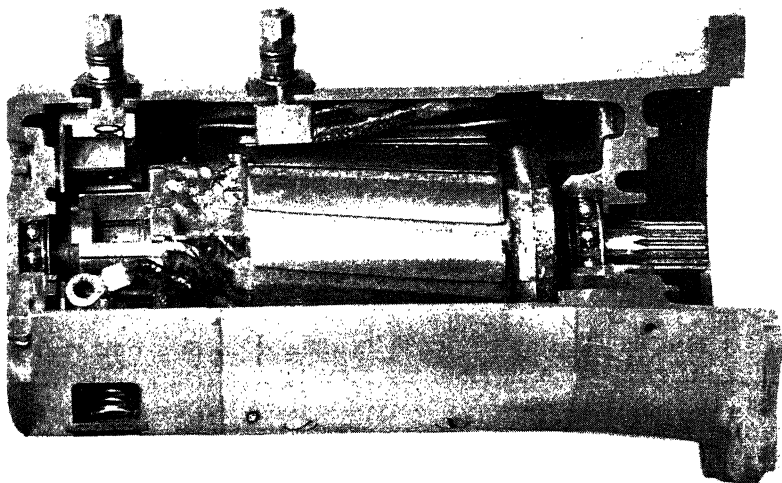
SECTIONAL VIEW OF B.T.H. STARTER MOTOR TYPE C.A. 4125
